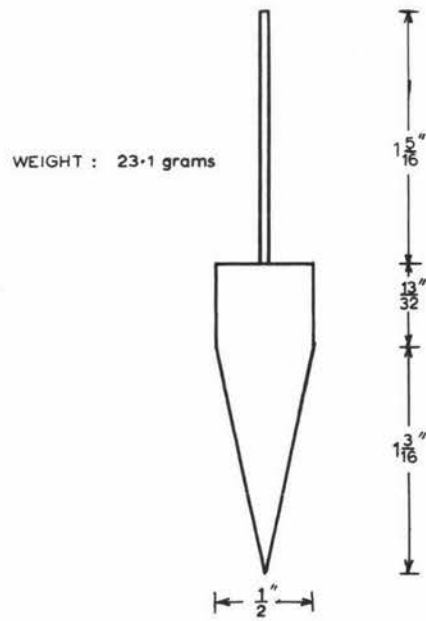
DIMENSIONS OF THE CONE-SHAPED PLUNGER FITTING FOR THE "CENTRAL" PENETROMETER
